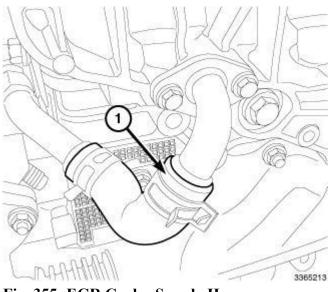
EGR Cooler Supply Hose Courtesy of CHRYSLER GROUP, LLC
